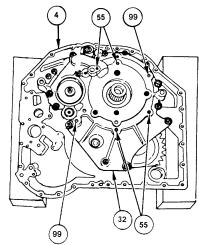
Right Hand Cover Assembly. INSTALL RIGHT BRAKE SUPPORT ASSEMBLY, BRAKE APPLY CAM, AND BRAKE ADJUSTING LINKS – Cont.
